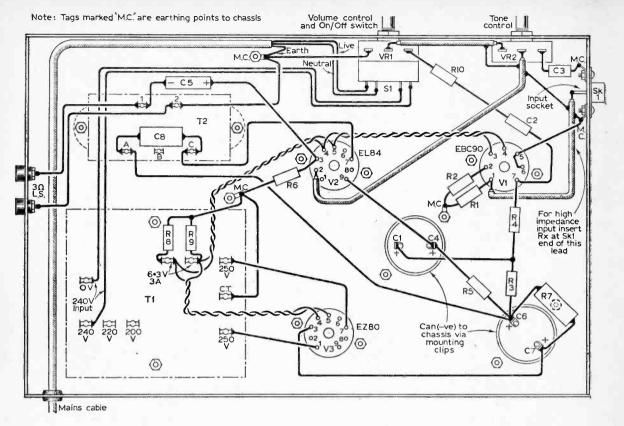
Underside wiring and layout of the complete amplifier. Note that T1 and T2 are mounted above the chassis,
